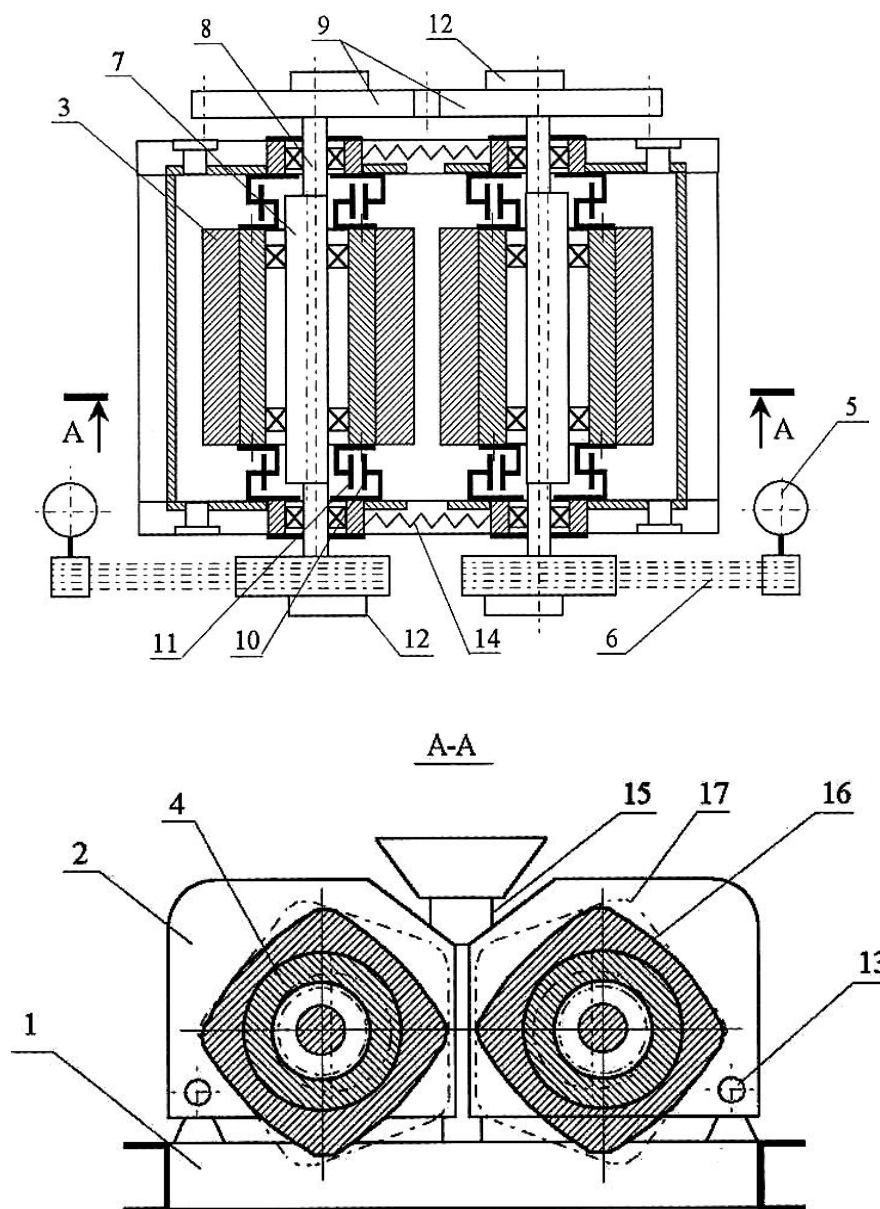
Schematic structure of the crusher (1 - frame; 2 - block; 3 - crushing plate; 4 - the hub; 5 - the electric motor; 6 - V-belt transmission; 7 - carrier; 8 - drive eccentric shaft; 9 - cogwheels; 10 - the crown wheel of a planetary gearbox; 11 - satellite; 12 - counterweights; 13 - the hinge; 14 - a spring; 15 - the emphasis; 16 - polygon (cross-section of the roll); 17 - the hypotrochoid)
